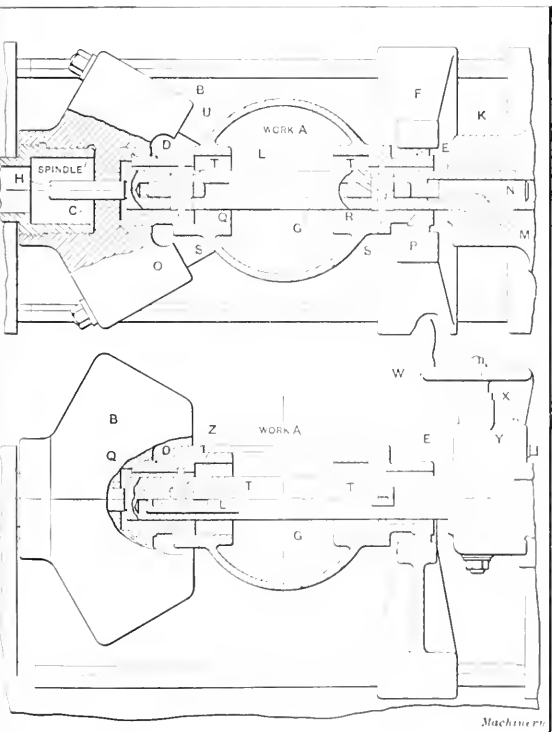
A Double Recessing Tool Arrangement for a Rear Axle Housing
